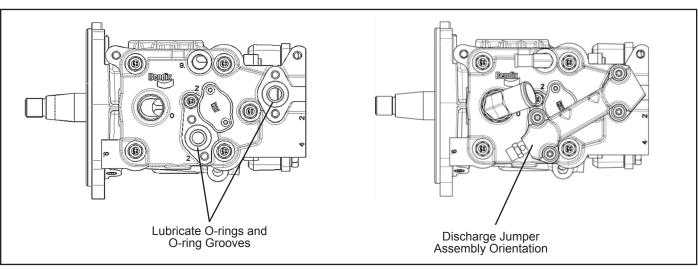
DISCHARGE JUMPER ASSEMBLY
